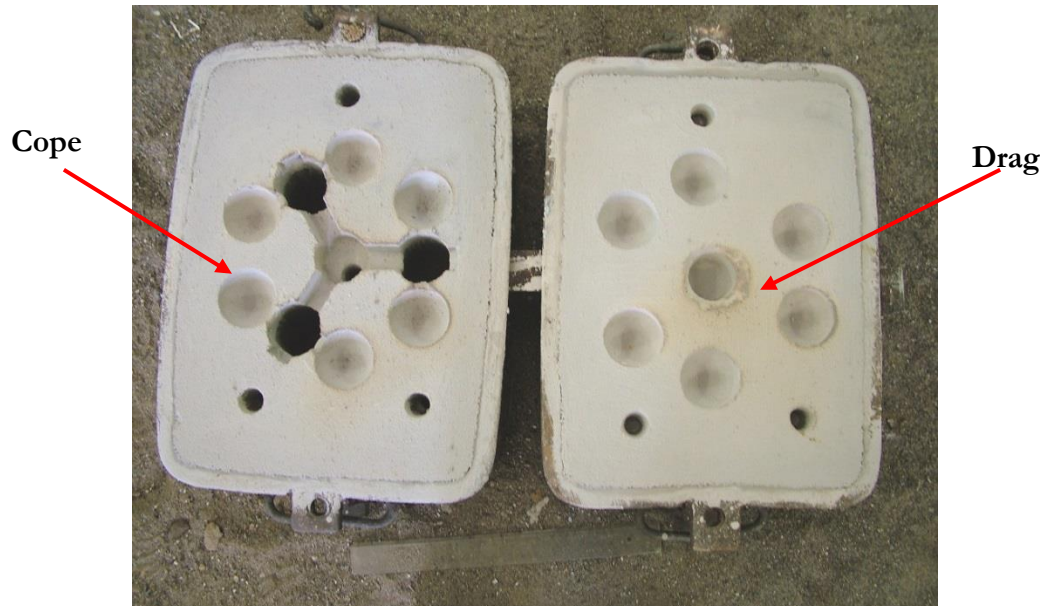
Photograph of the cope and drag used for sand casting grinding balls.
